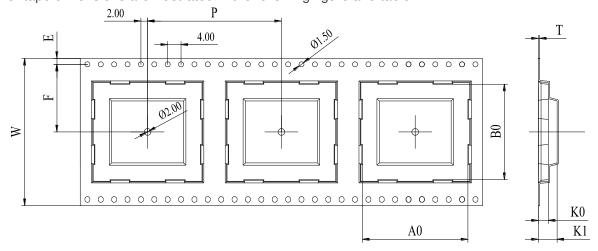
Carrier Tape Dimension Drawing (Unit: mm)
